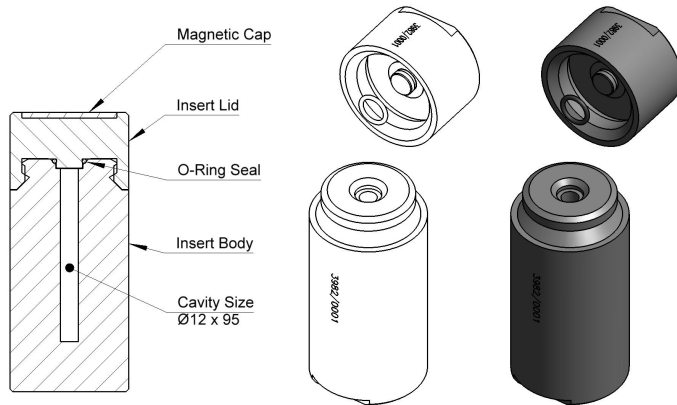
Shielding insert HS-12x95-Tu insert Design # 3982
